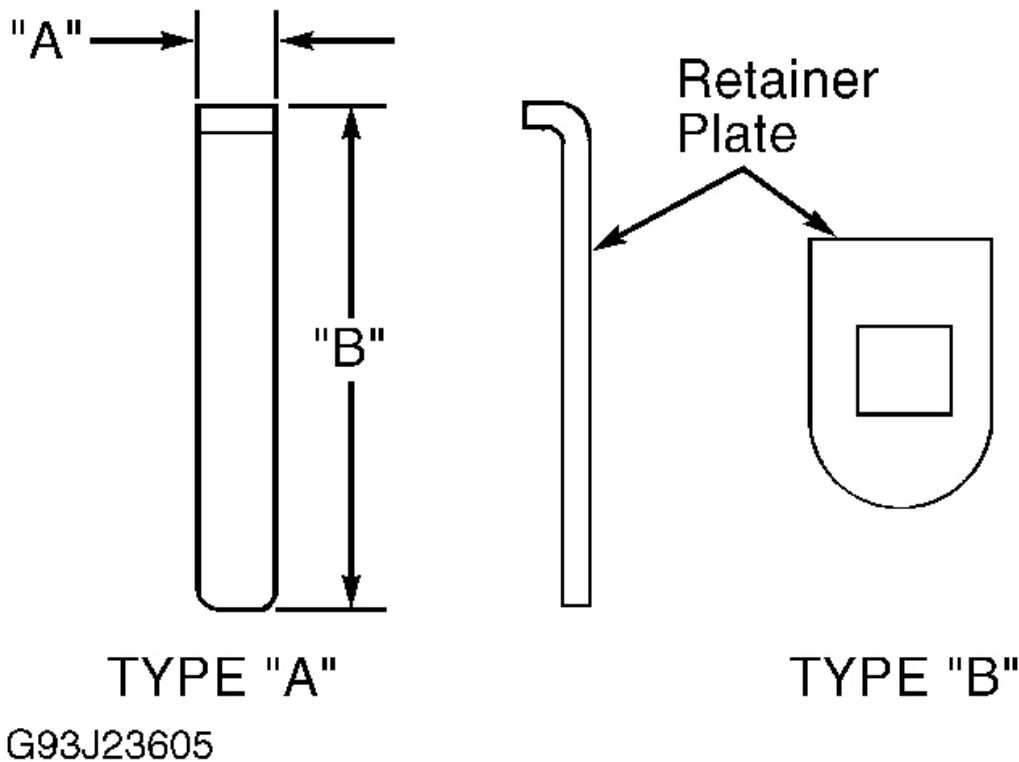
Measuring Retainer Plate Dimensions (Lower Valve Body)
